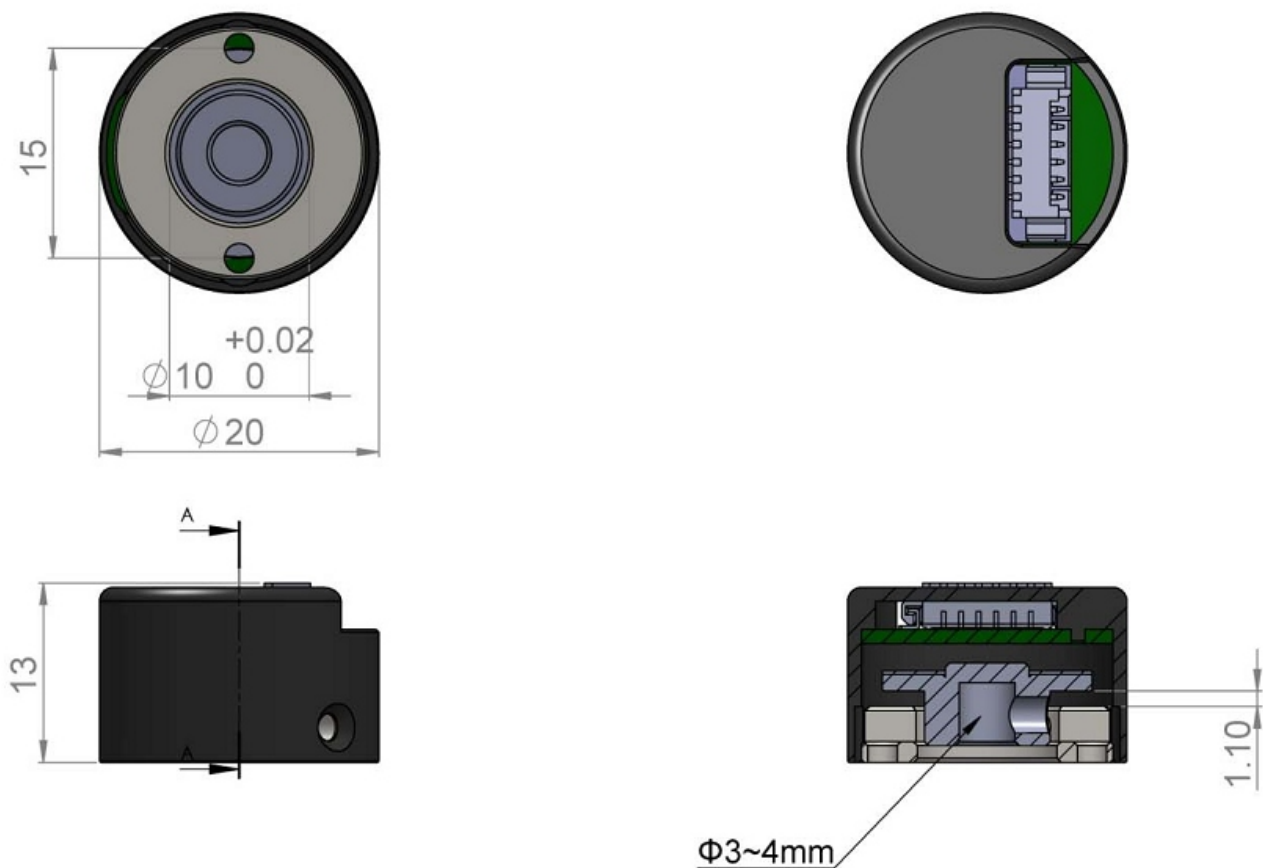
Bottom view, top view, side view, and cut view (units = mm)
